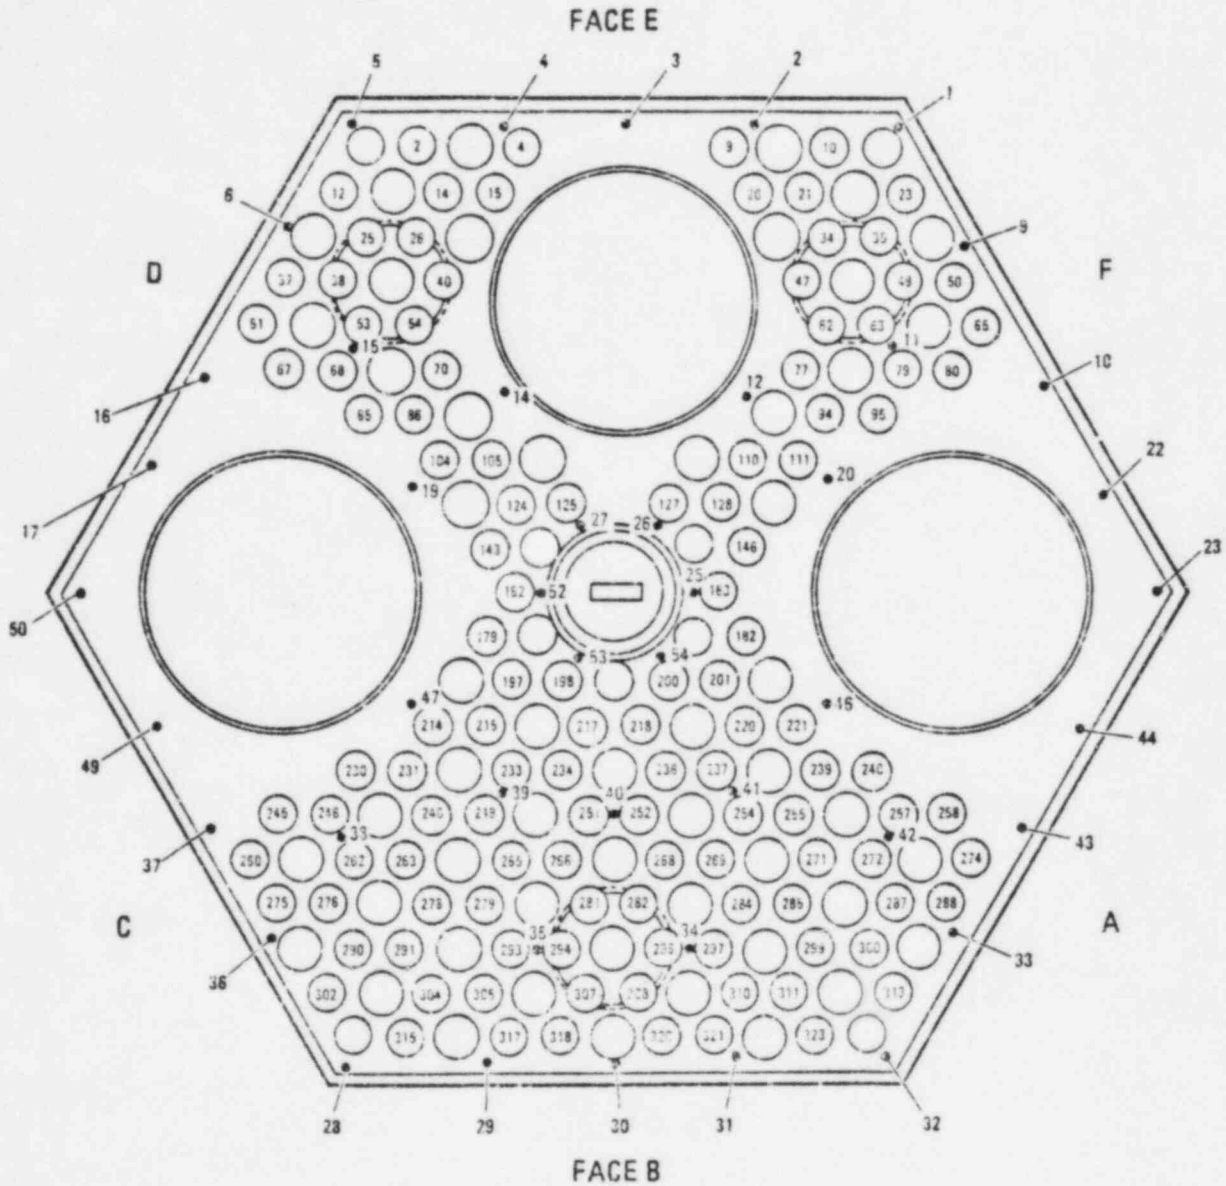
Top surface measurements (Sheet 1 of 2)
